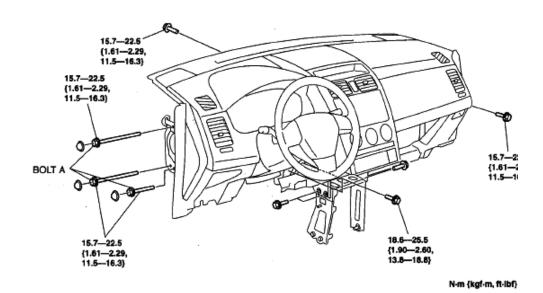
Identifying Dashboard Bolts & Torque Specifications Courtesy of MAZDA MOTORS CORP.
